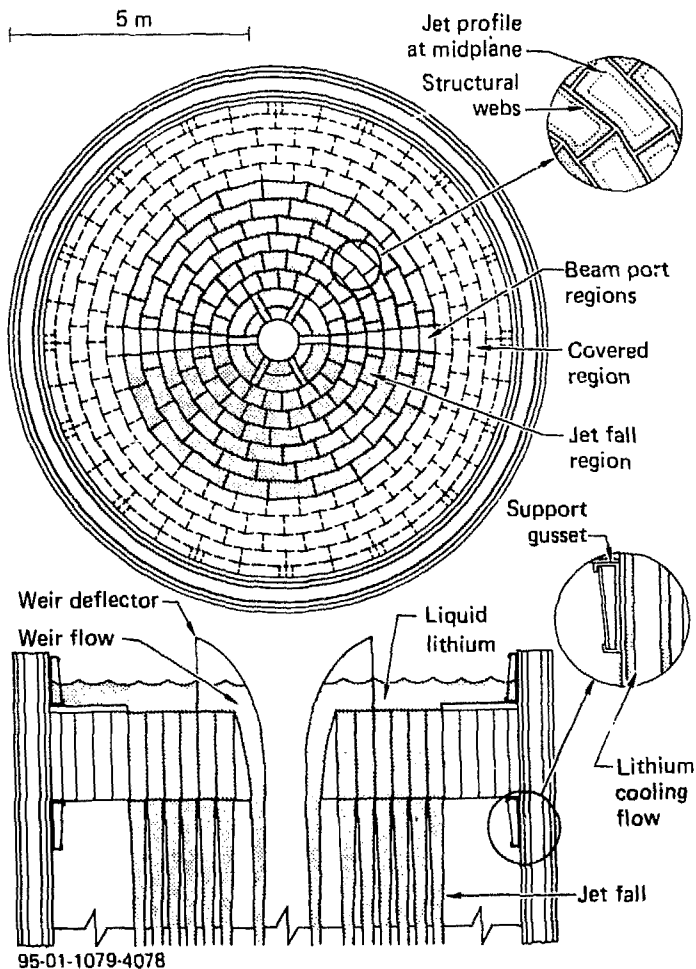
Cross section and elevation views of the modified nozzle plate.
